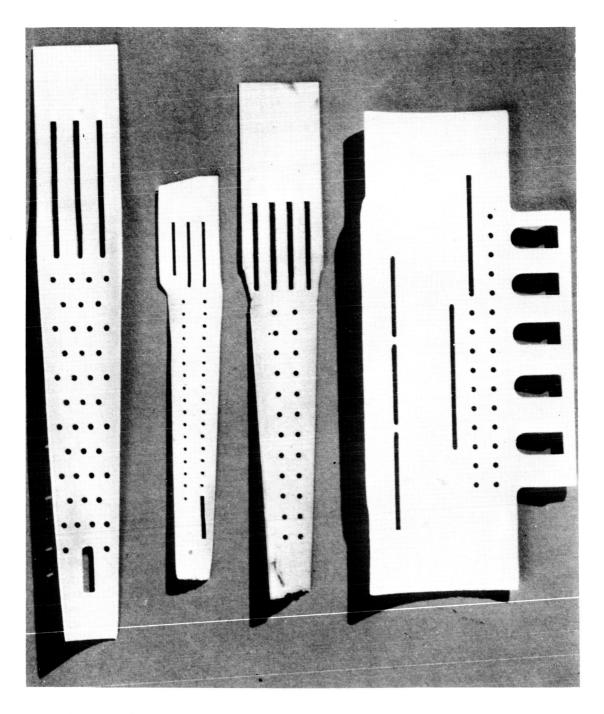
EXAMPLES OF PREFORMED CERAMIC CORES FOR AIR-COOLED TURBINE BLADES
